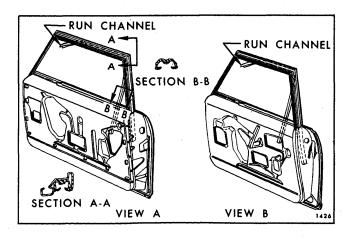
Front Door Glass Run Channel Assembly "X" Closed Styles
